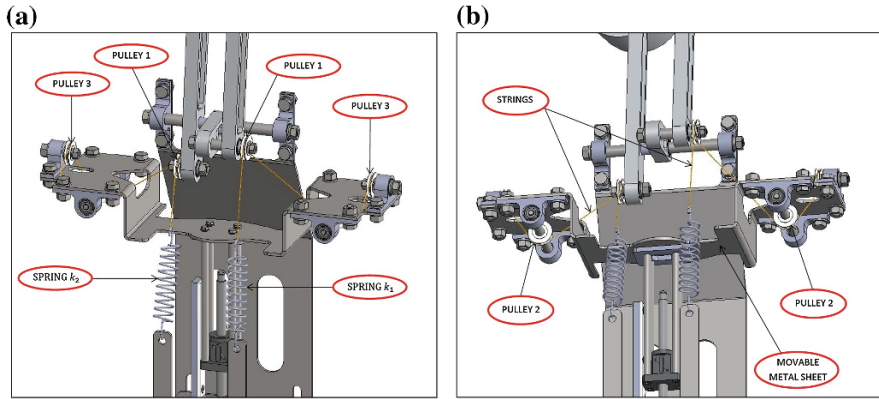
Detailed views of the gravity balancing mechanism. a *Upper* detailed view. b *Lower* detailed view
